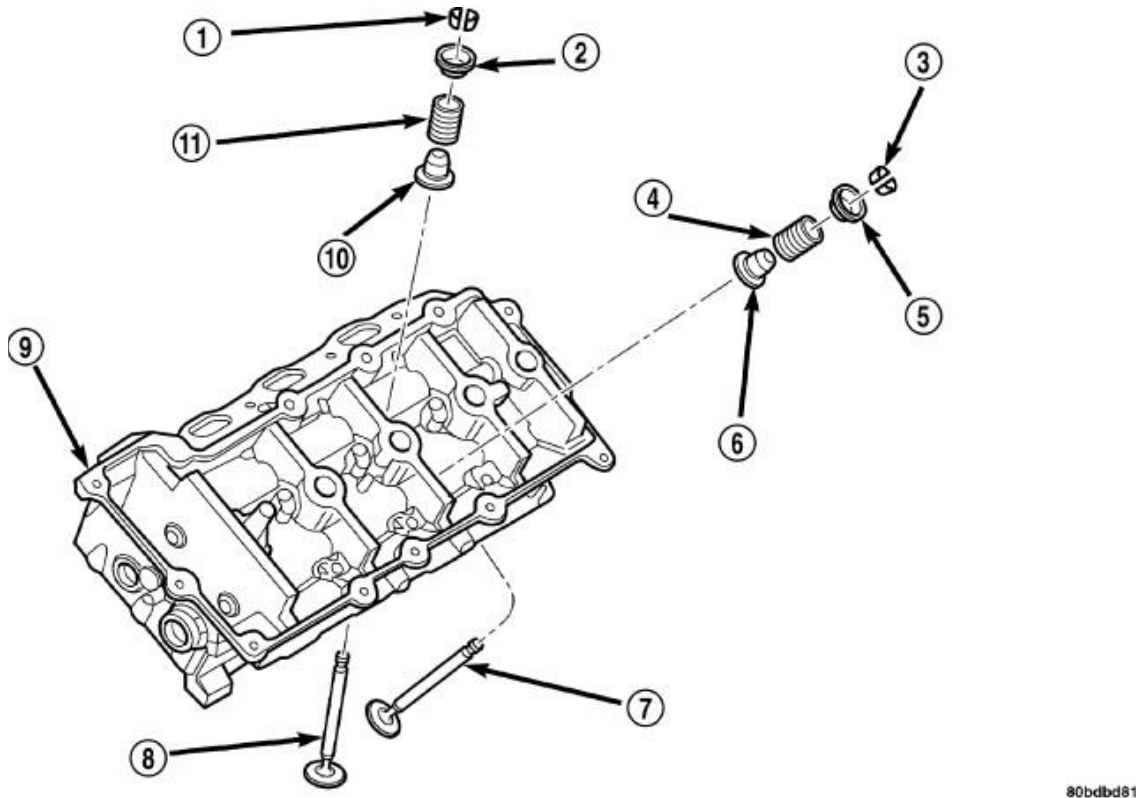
VALVE, SPRING SEAT/SEAL, SPRING, RETAINER AND LOCKS
